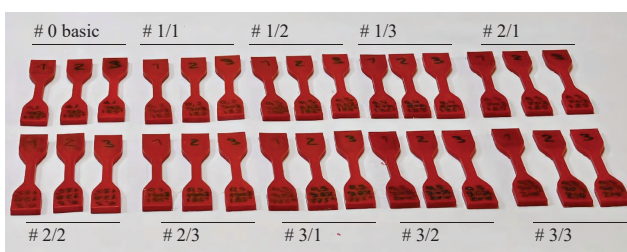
Specimens for mechanical testing and printing accuracy assessment
